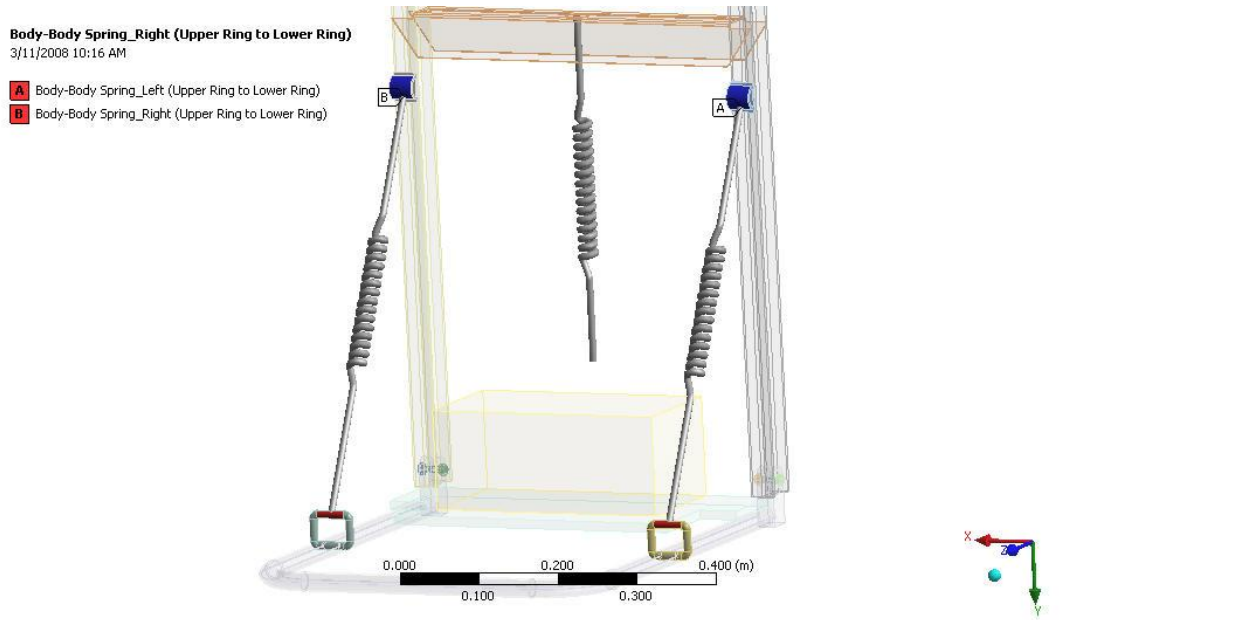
Scoped surfaces on Upper and Lower Rings
